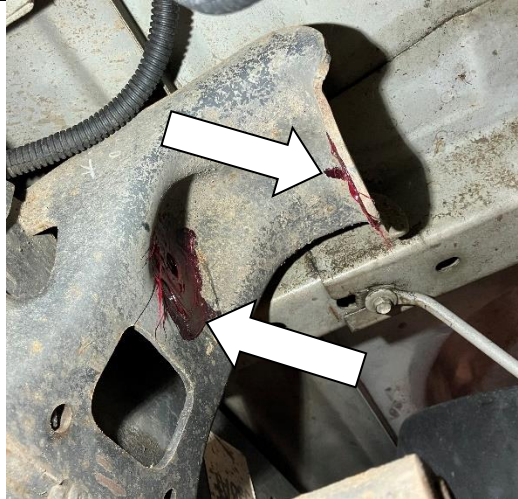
Greased Bearing Surface on Frame Side Shackle Mount.
